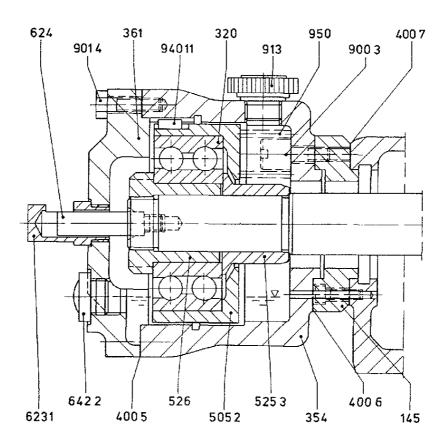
Lift-off device with roller bearings for pumps with plain bearings
